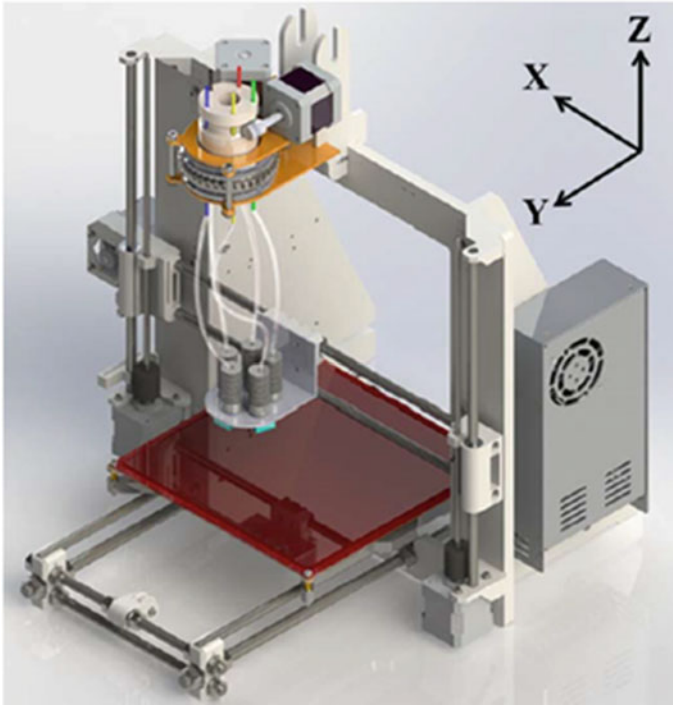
Multi-Nozzle 3D Printer [19]
